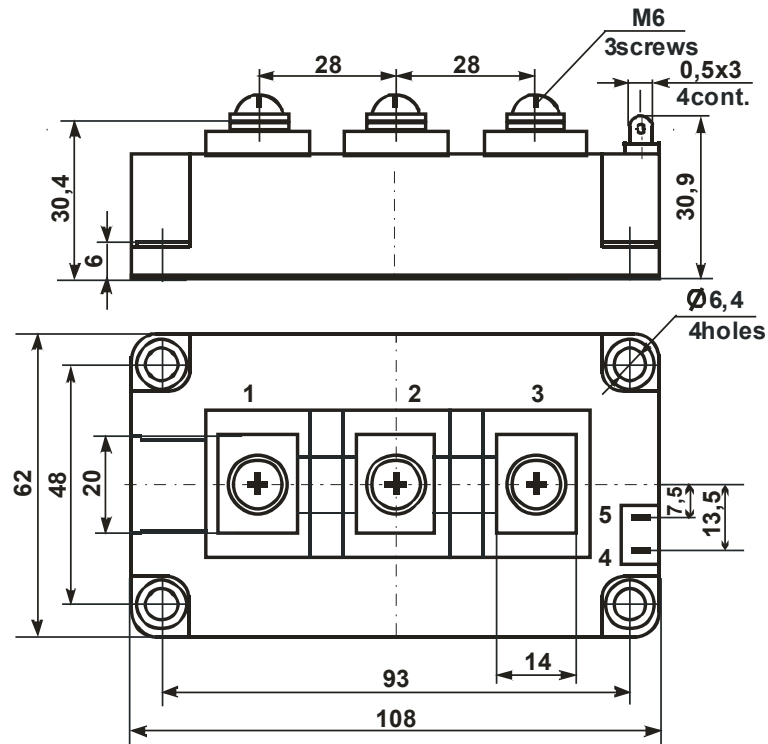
Overall dimensions of modules M11 (housing "E3-1")
